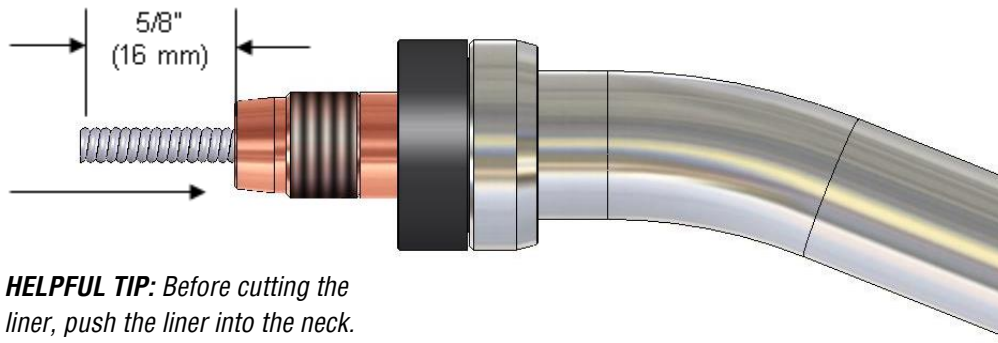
The recommended cut length for the QUICK LOAD liner is 5/8" (16 mm). Make sure the liner is pushed into the neck when this length is determined.
